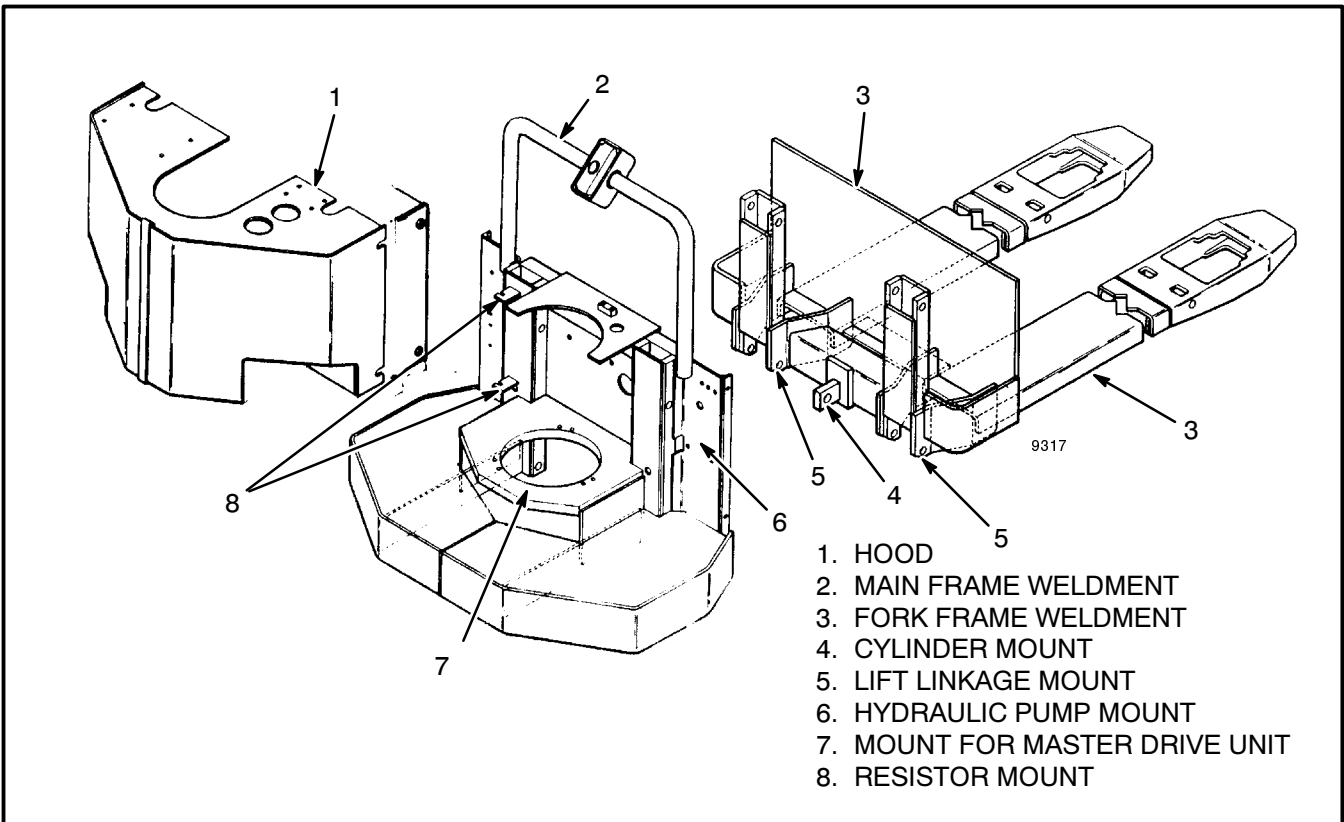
FRAME WELDMENT - B40-60XL, B40CL
